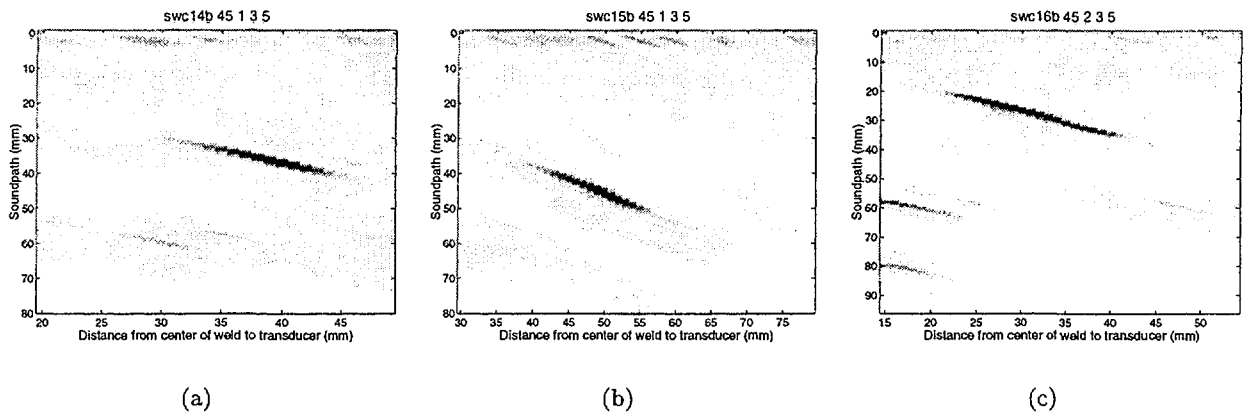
Backside measurements from sidewall cracks using the 45-degree 3.5 MHz transducer (a) 3 mm crack, 24 mm from bottom surface (b) 7 mm crack, 29 mm from bottom surface (c) 7 mm crack, 17 mm from bottom surface.
